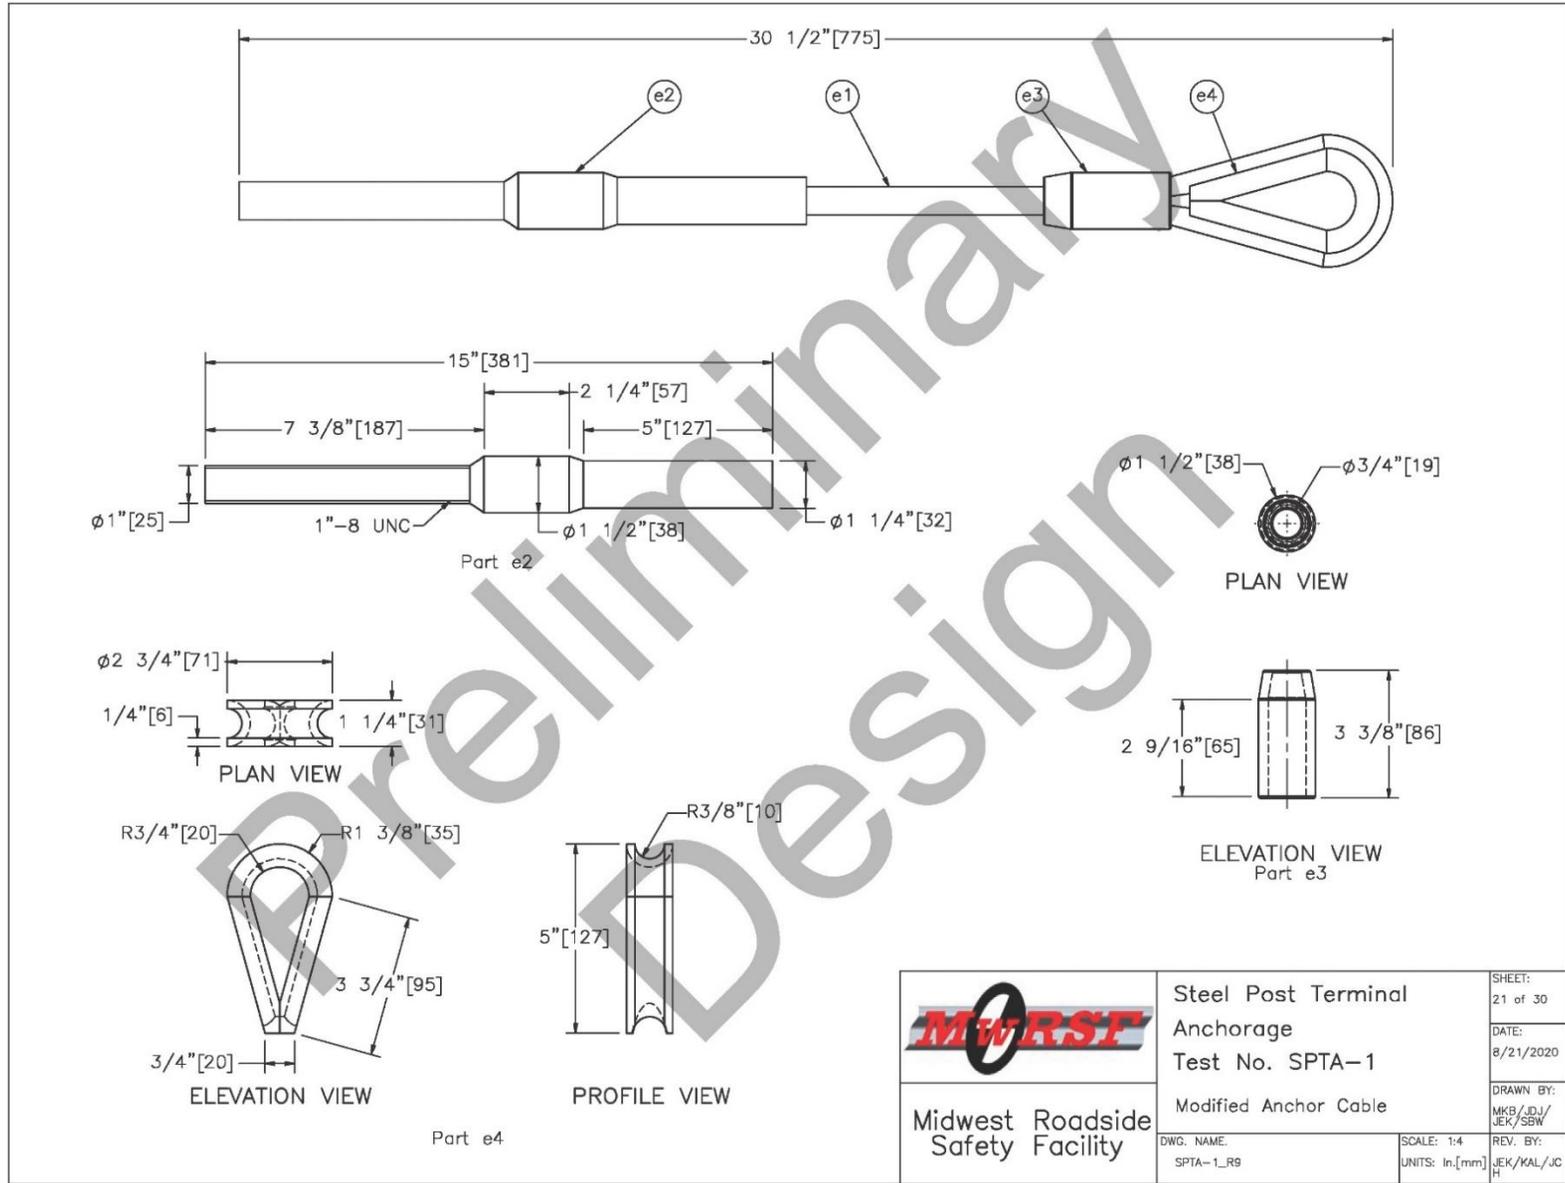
Modified Anchor Cable, Test No. SPTA-1
